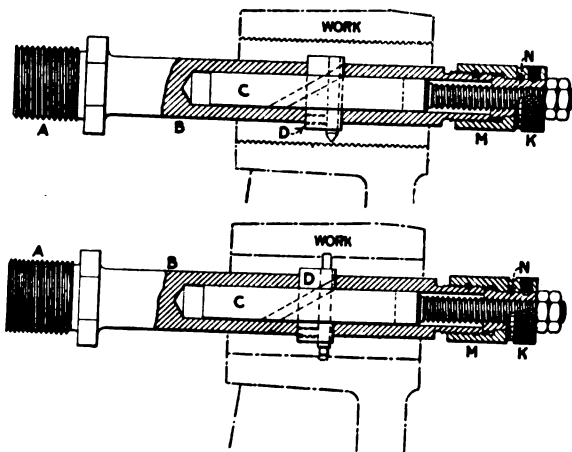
BORING BAR FOR USE ON BORING MACHINE
